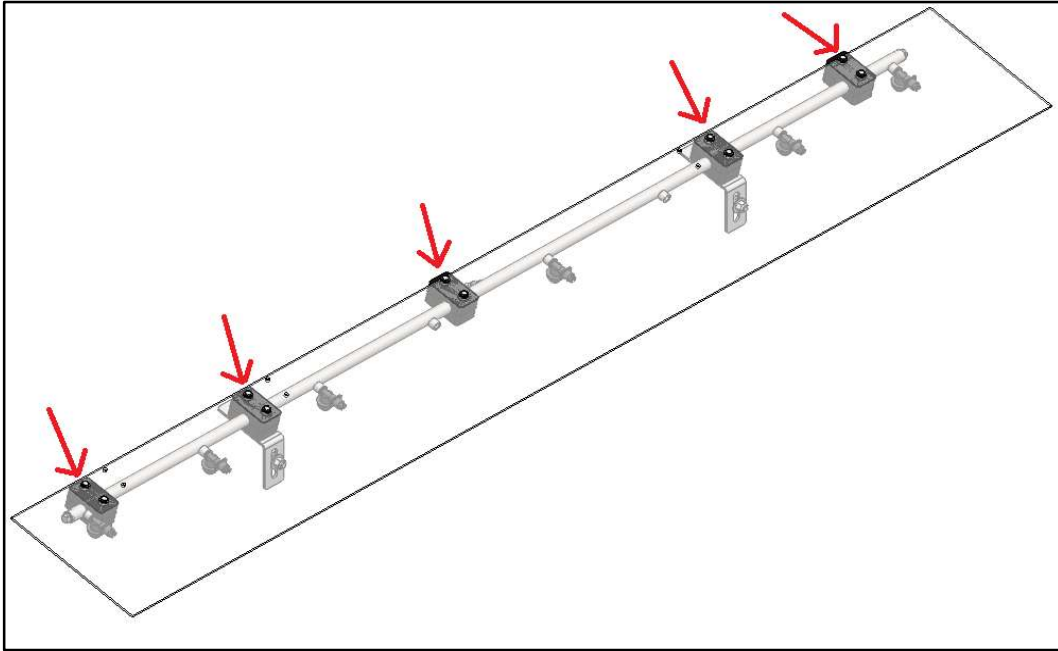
Locations of the ten screws to be removed from the existing Tire Shine assembly. There are two screws per marked location.
